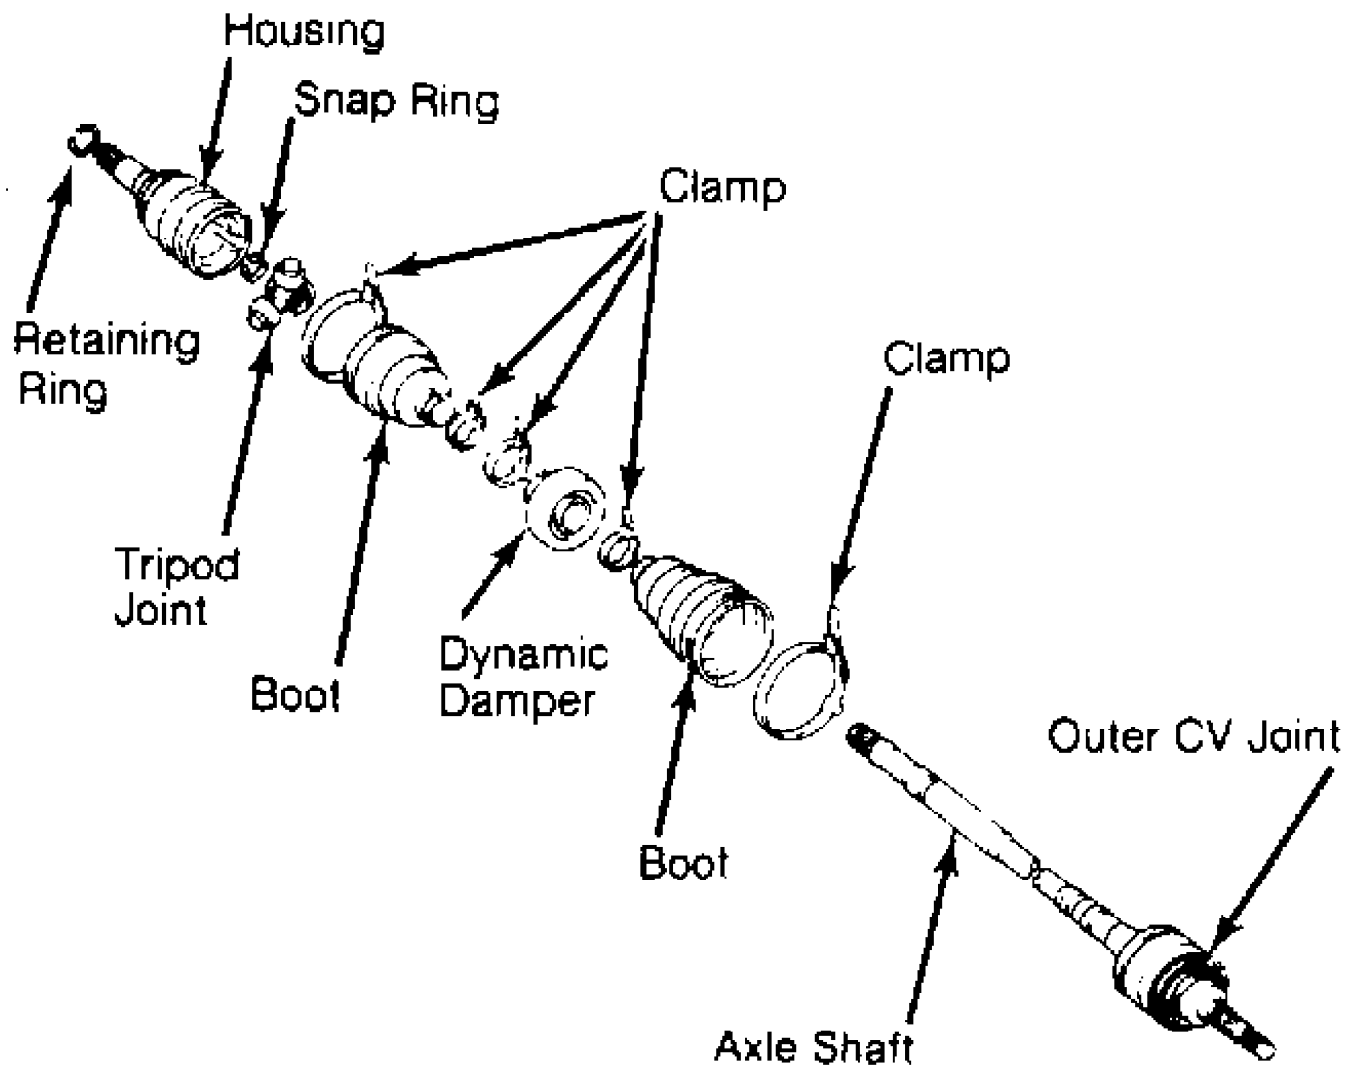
Exploded View of Tercel Drive Axle Shaft
